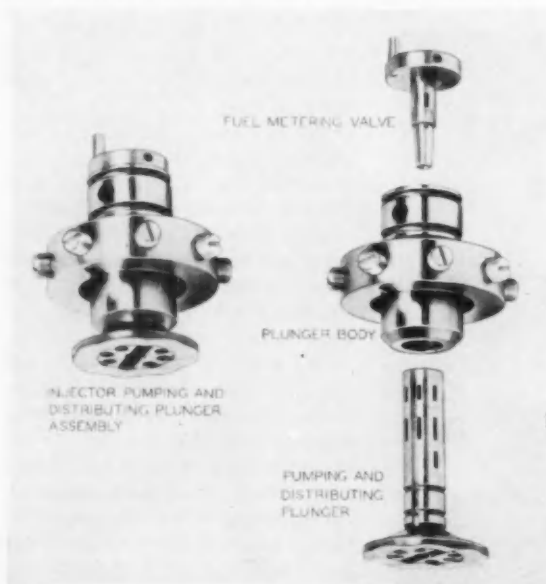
Pumping and distributing plunger assembly of the injection pump
